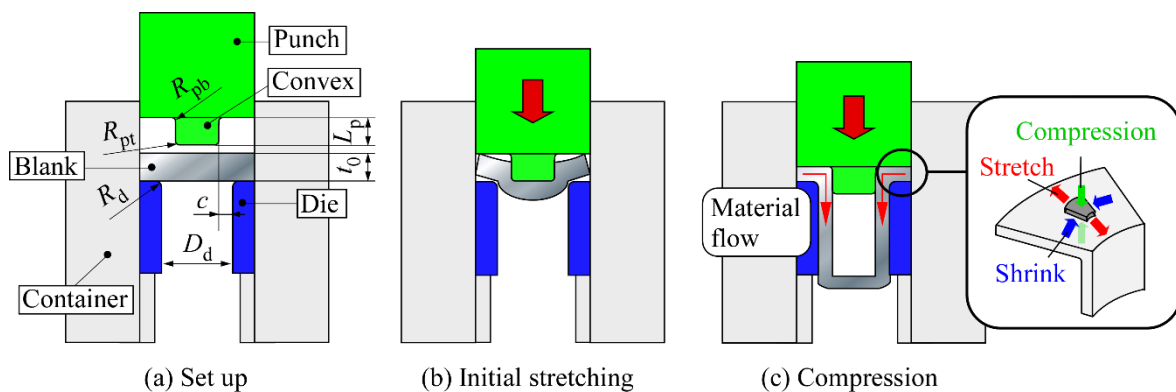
Schematic illustration of deep drawing applying compressive force on flange
